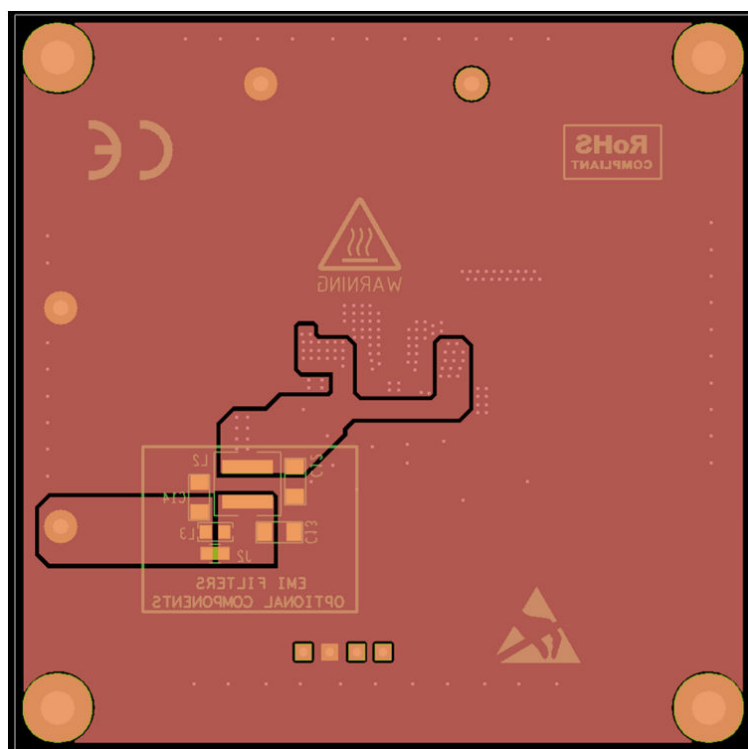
STEVAL-A6983CNV1 evaluation board - PCB layout (bottom layer)
